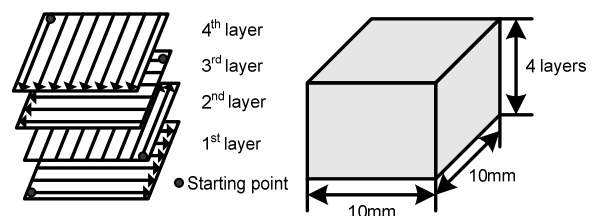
Illustration of the cross-hatching technique and the specification of specimen
